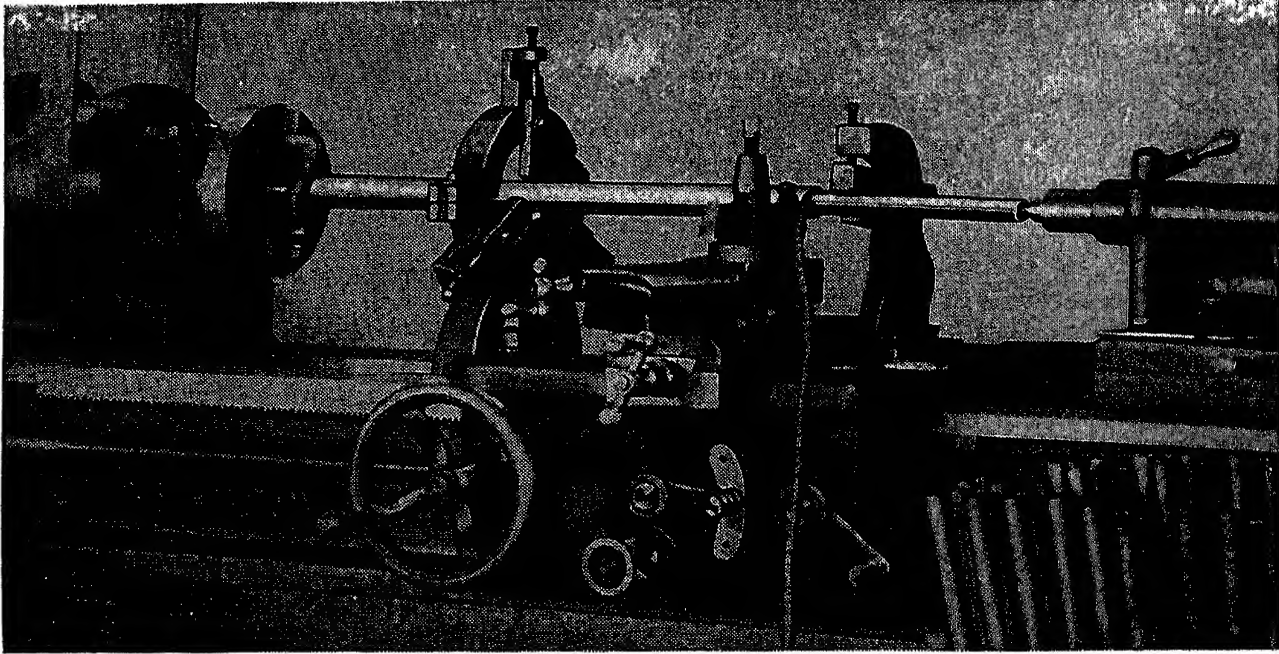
A long slender shaft supported by both a center rest and a follower rest while being turned. (Courtesy South Bend Lathe Works.)
